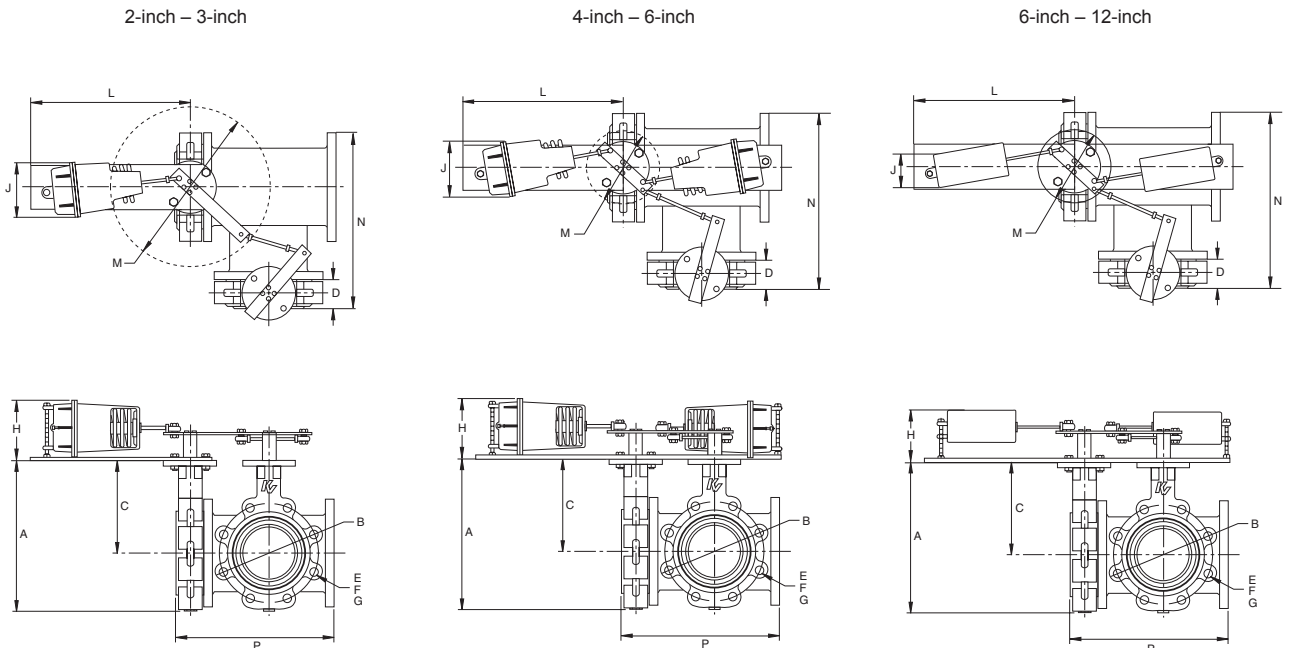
Three-Way Valve Assemblies with Pneumatic Actuators
